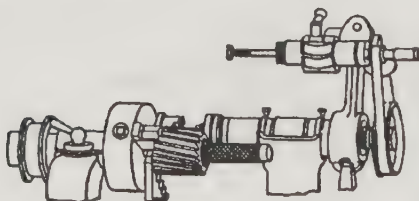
Internal Grinding Attachment, Thrown out of Position for Purpose of Measuring Work.
